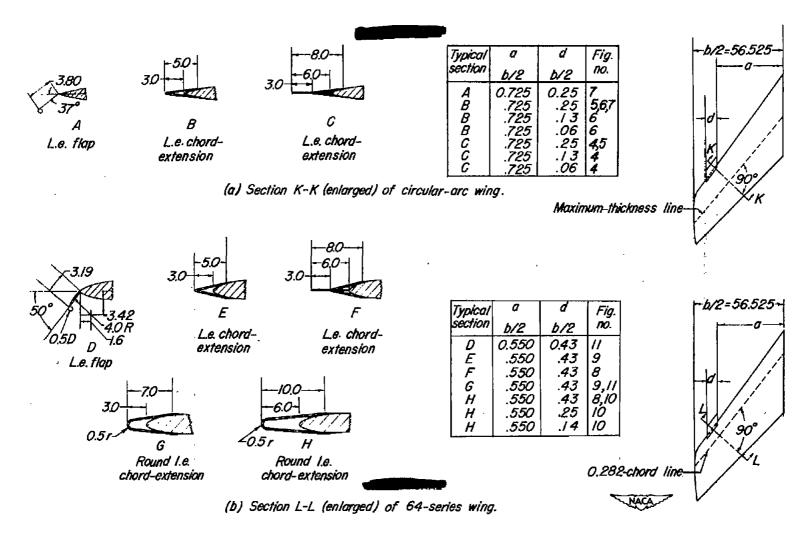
Details of typical leading-edge devices for circular-arc and 64-series wings. All dimensions are in inches unless otherwise specified.
